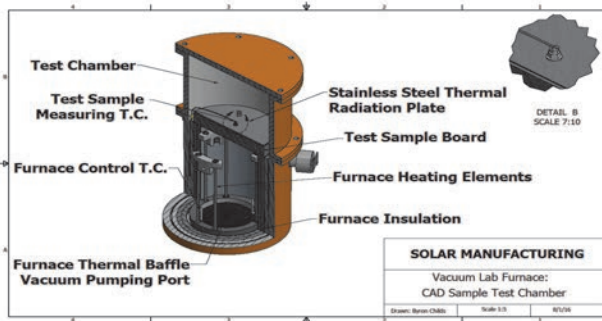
Schematic of test chamber showing extension for test sample placement.
